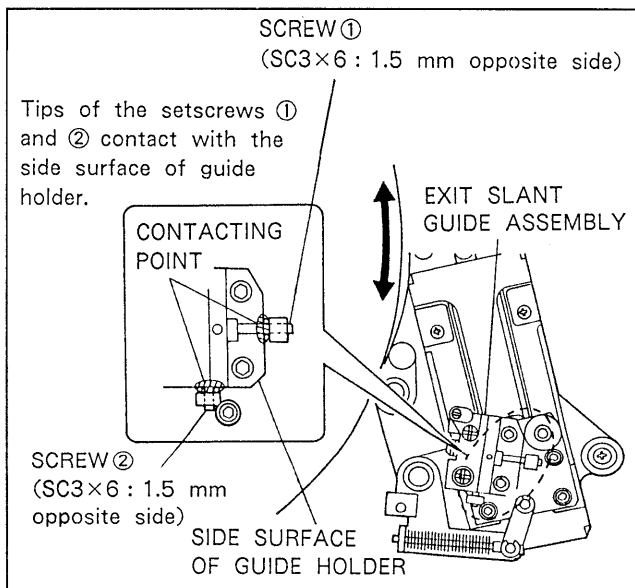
Screw Position of Exit Slant Guide Assembly
